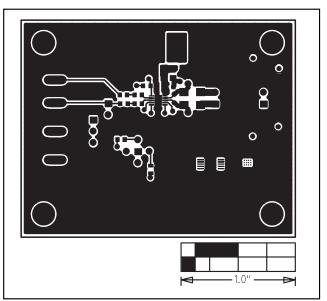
MAX9700B EV Kit PC Board Layout—Component Side
